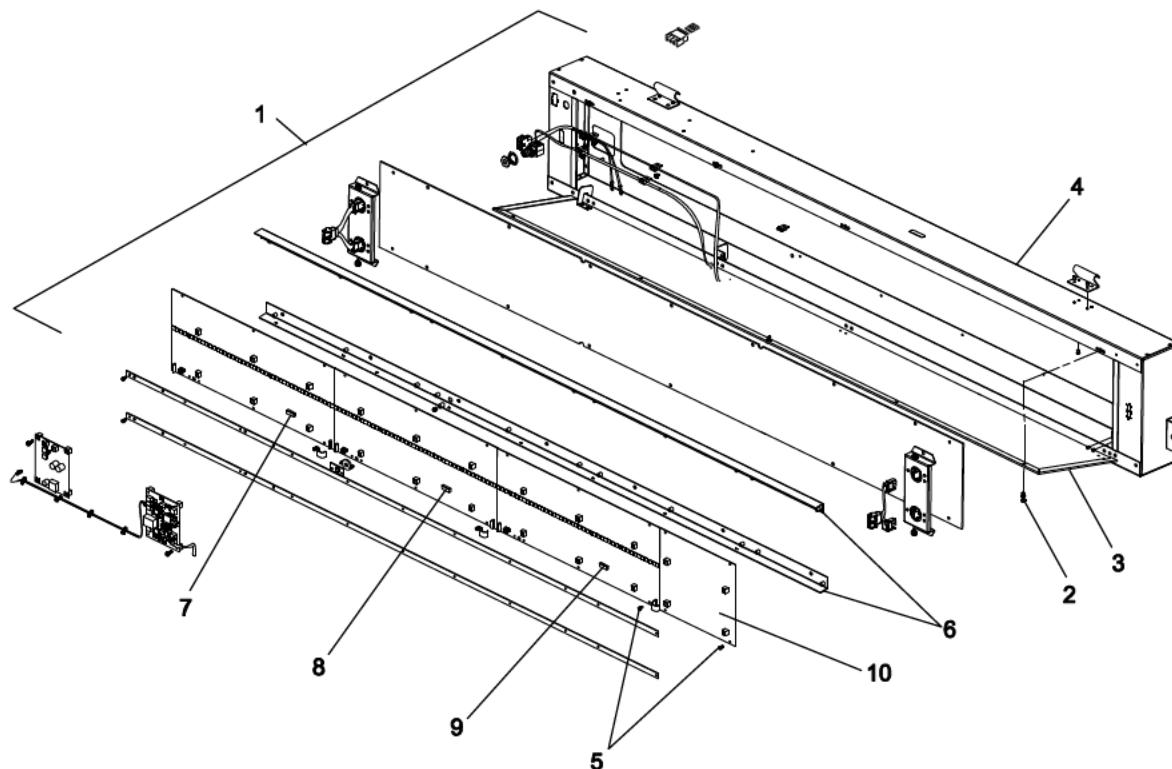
Replace Front Destination Sign LED Display Matrix PCB
